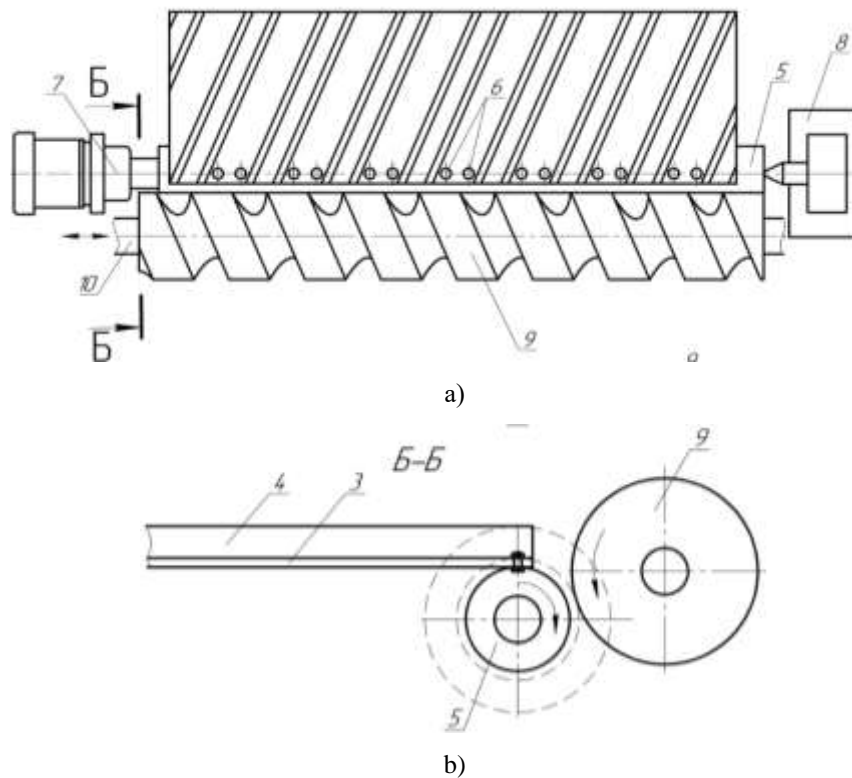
Scheme of manufacturing indentations on a screw workpiece:
